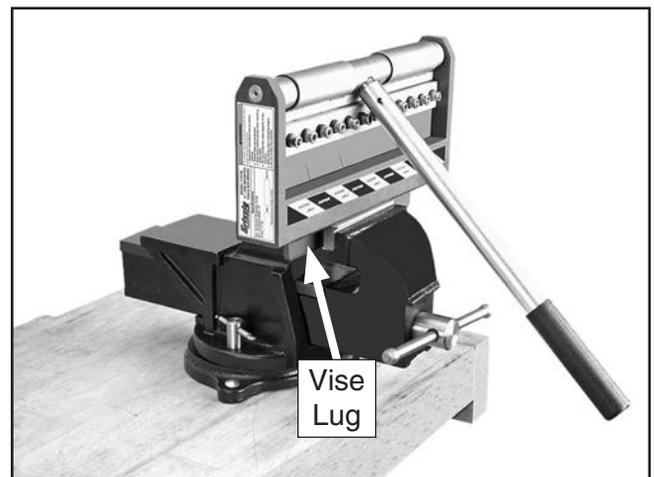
Example of Model T10726 secured in vise mounted to a workbench.
